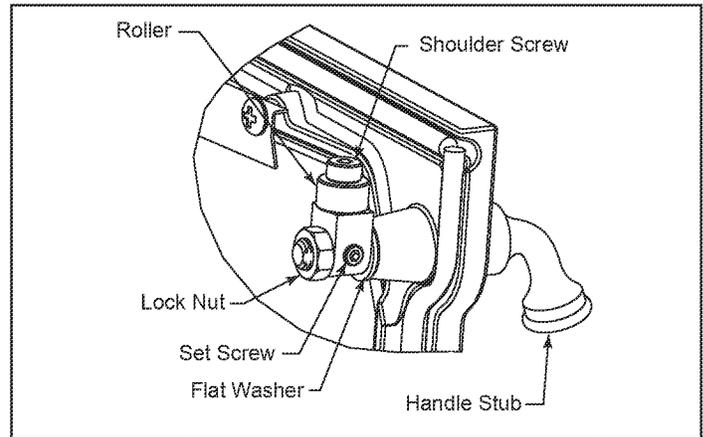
Rotate pawl and/or remove flat washer to adjust latch.
